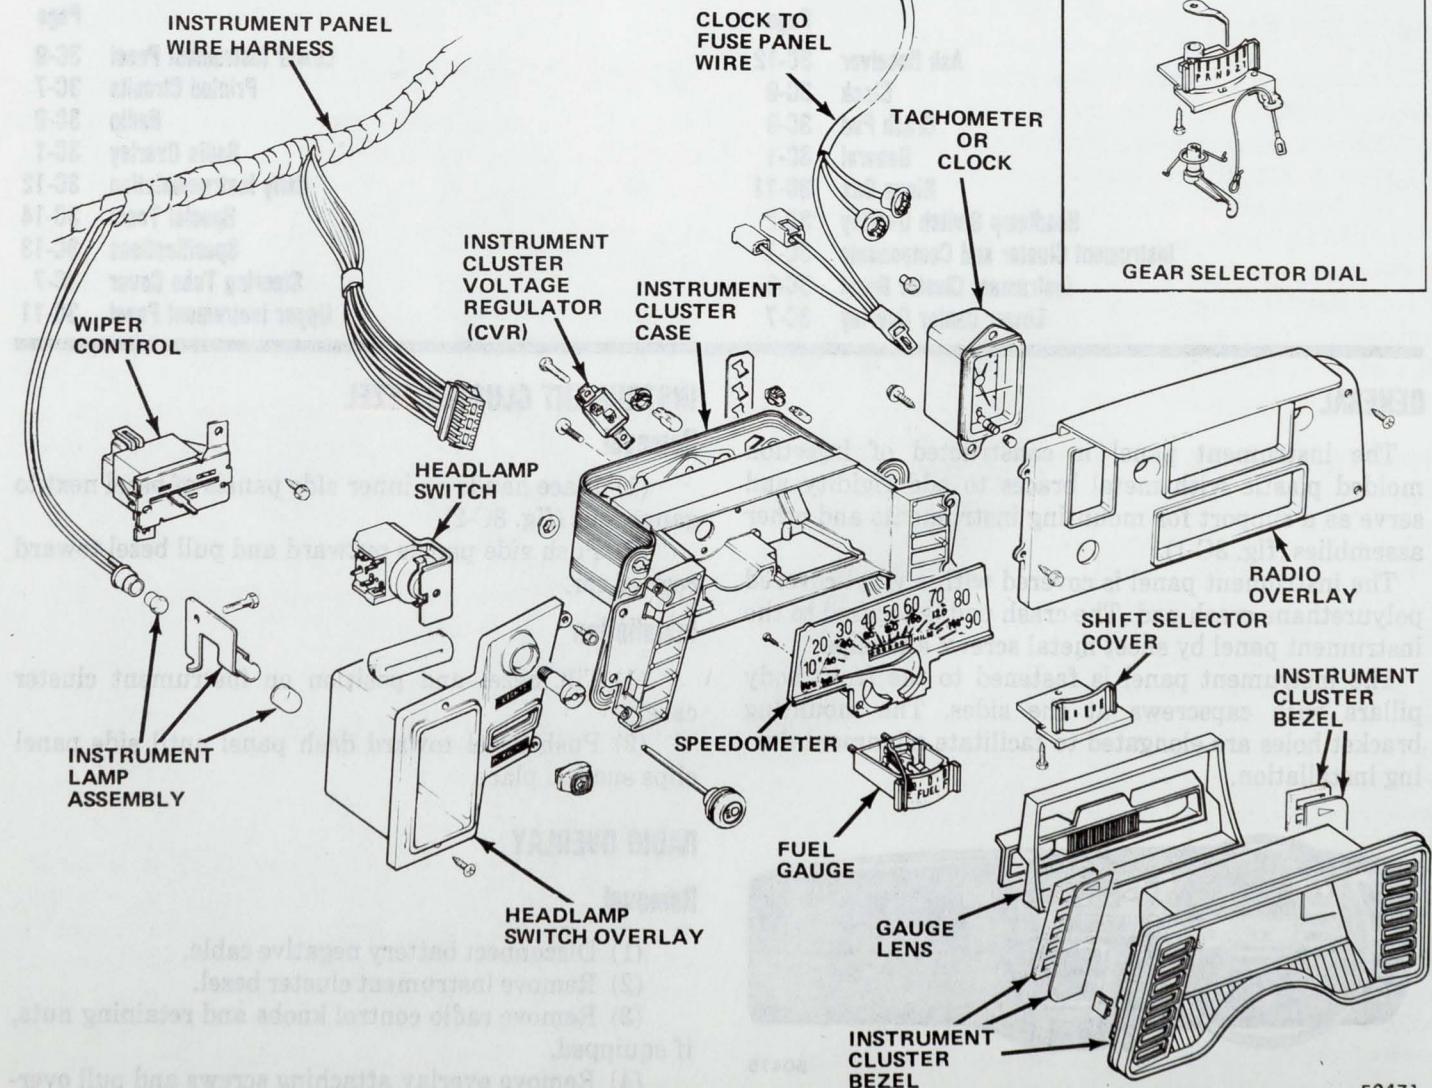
C-2 Instrument Cluster and Instrument Panel—Exploded View
